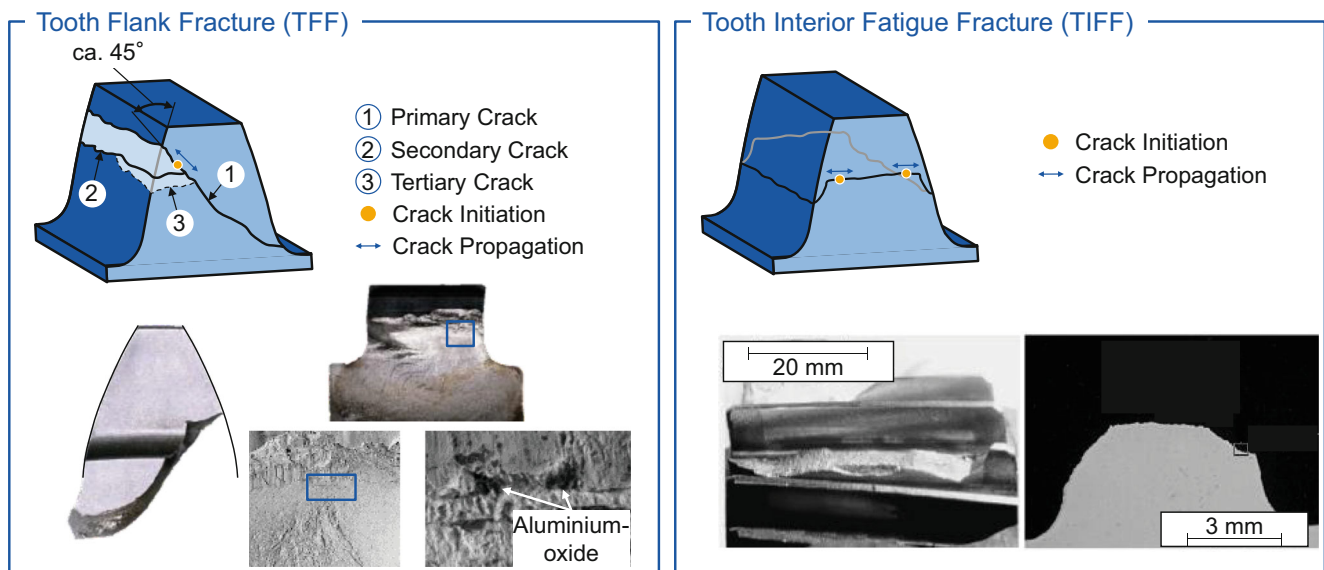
Comparison of Tooth Flank Fracture and Tooth Interior Fatigue Fracture [1, 11]
